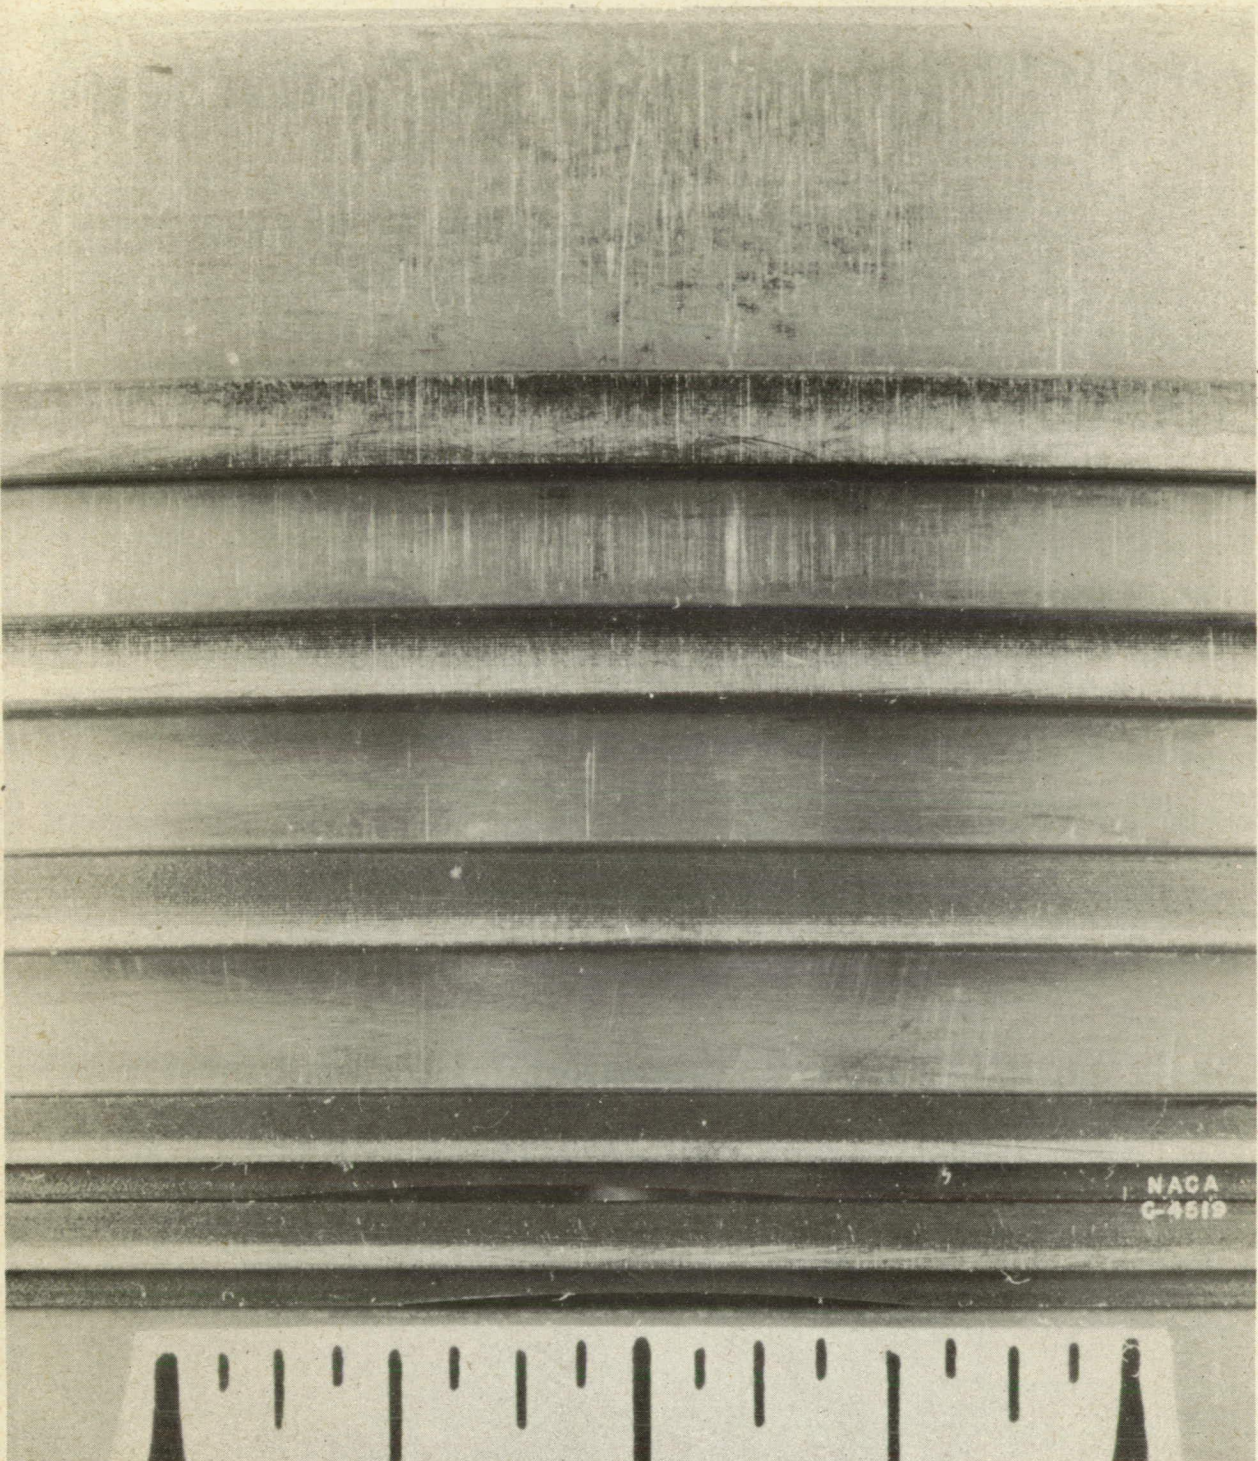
Condition of surface of the top five piston rings,  $180^\circ$  from gaps, after operation in previously used straight-bore porous chrome-plated cylinder barrel with  $1^\circ$  taper-face compression rings after test 6. X5.
